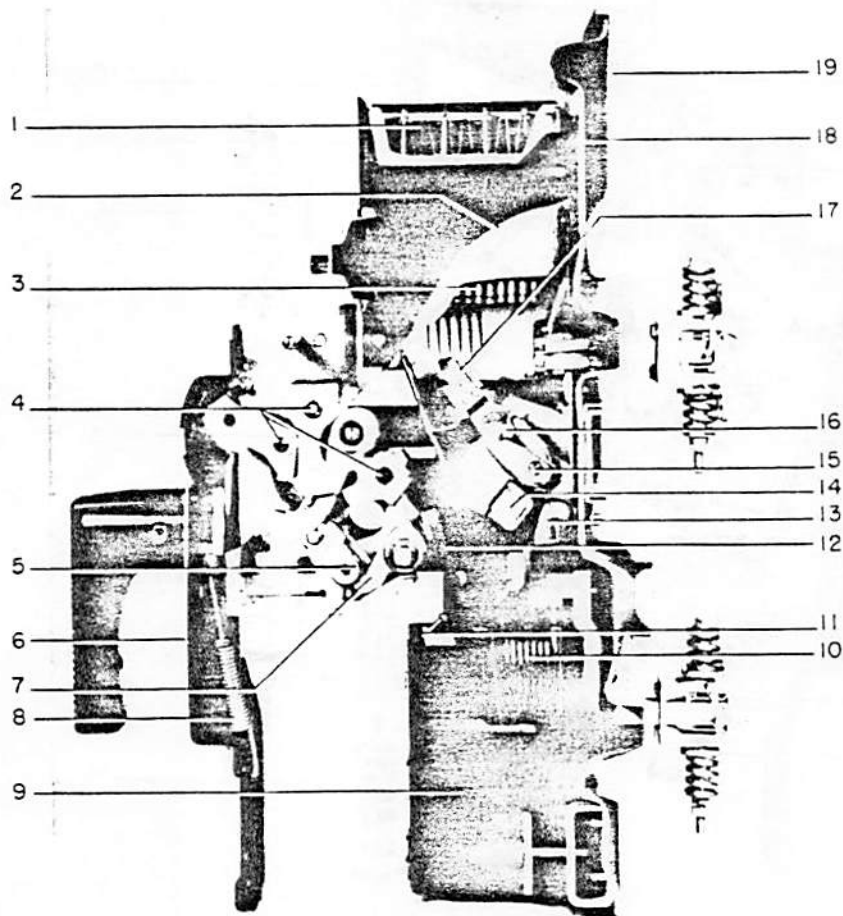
(8024516) Cut Away Model of Manually Operated AK-2 Breaker
